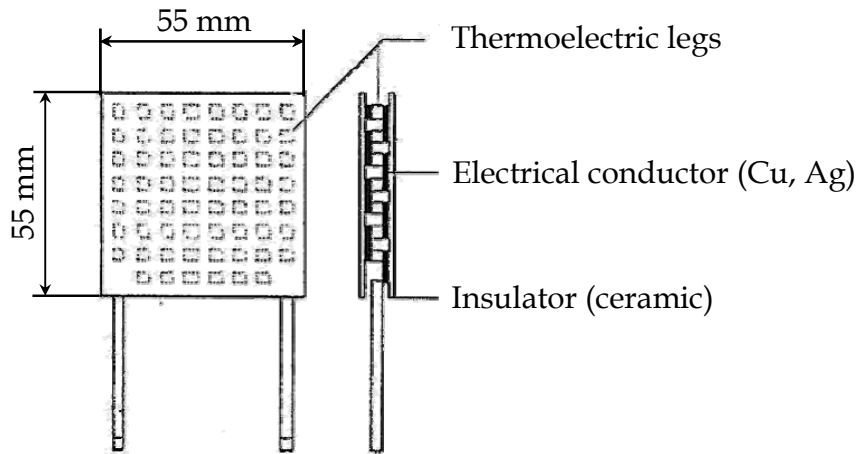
Configuration and dimensions of a commercial thermoelectric module [18]
